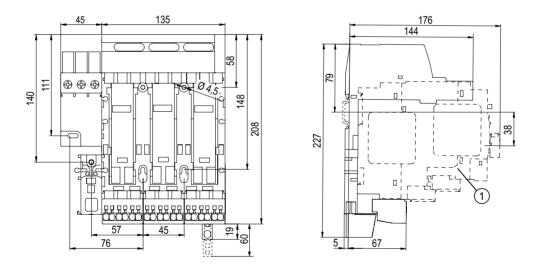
Dimension drawing of screw-type infeed (25/35 mm<sup>2</sup>) featuring outgoing terminals with spring-loaded connection technology
